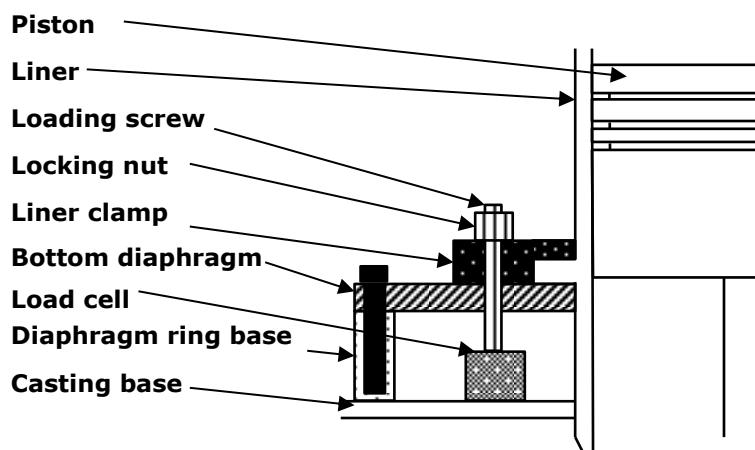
Schematic of liner clamping with bottom diaphragm assembly
